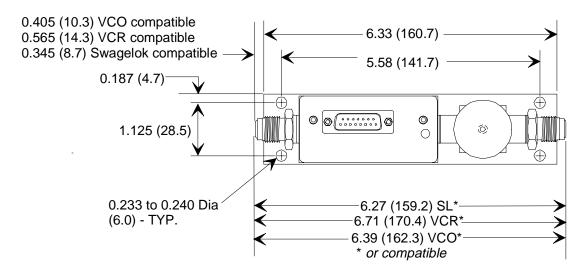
Mounting Dimensions of the Type 2179 Flow Controller
